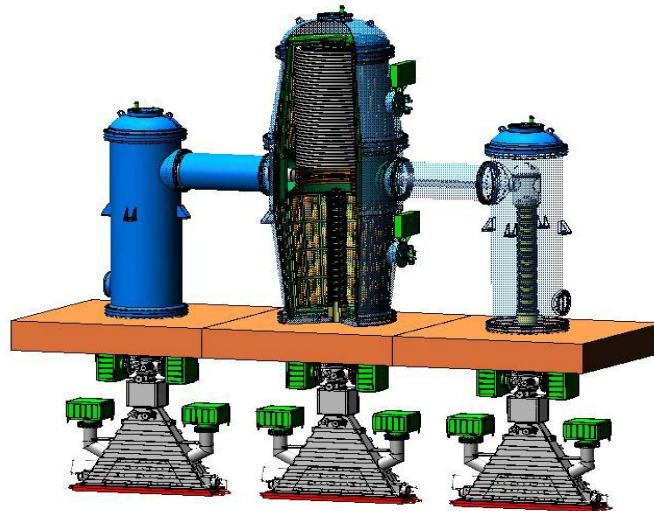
Typical model of the accelerator of 1MeV, 400kW in assembly
